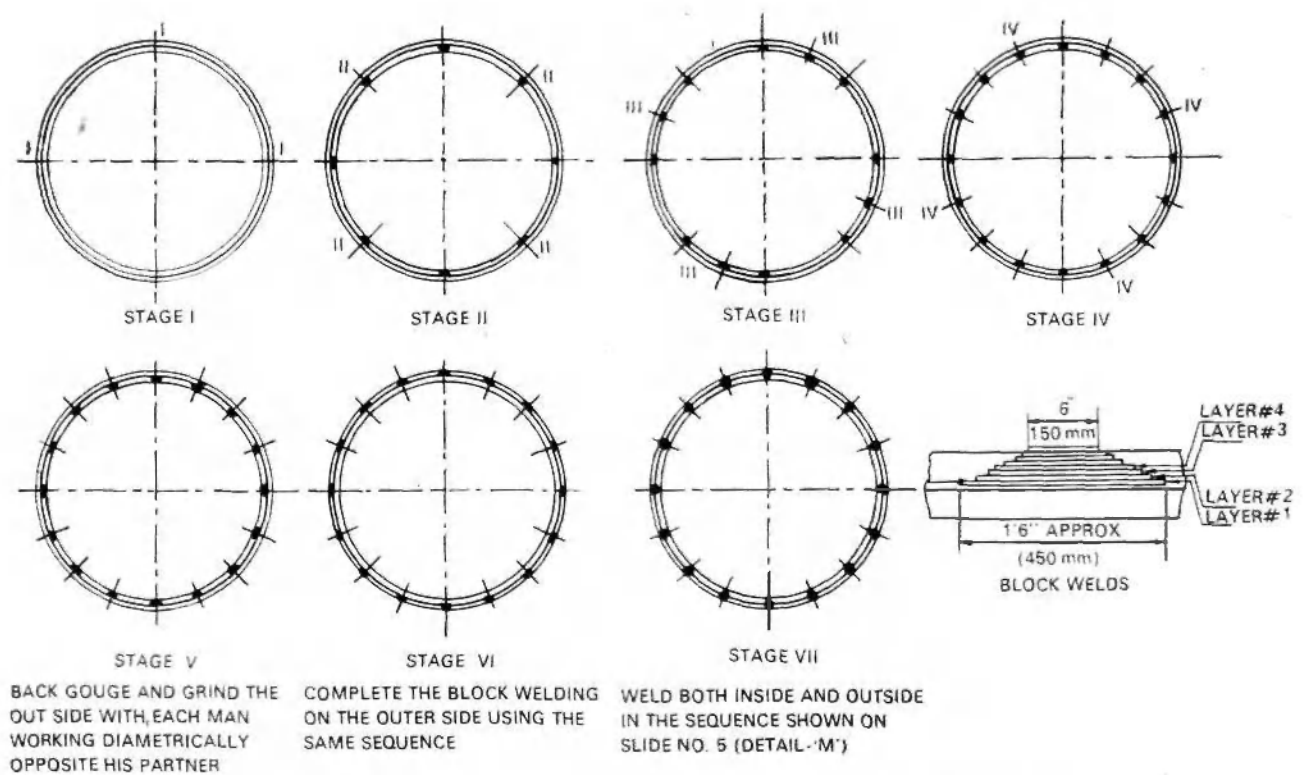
Welding Sequence of fieldweld between Calandria and End shields
